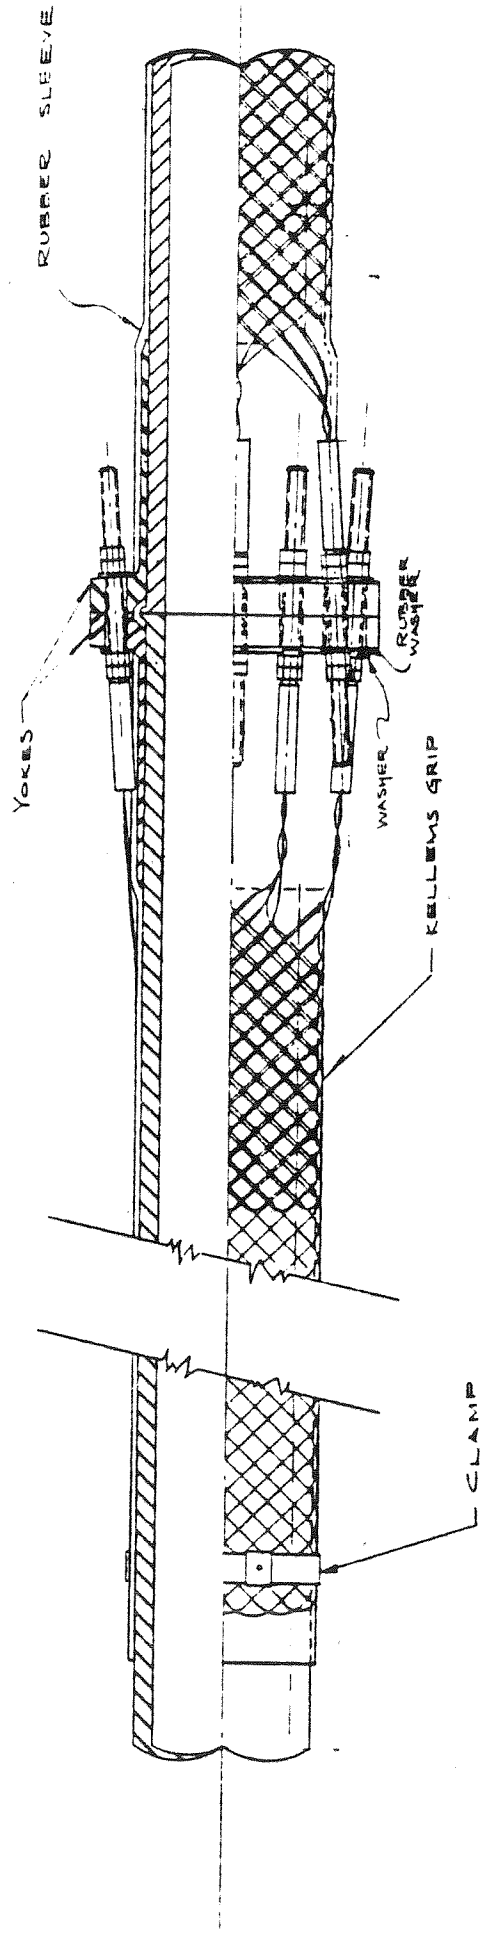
Polyethylene pipe butt-weld protection assembly with Kelleem grips.
